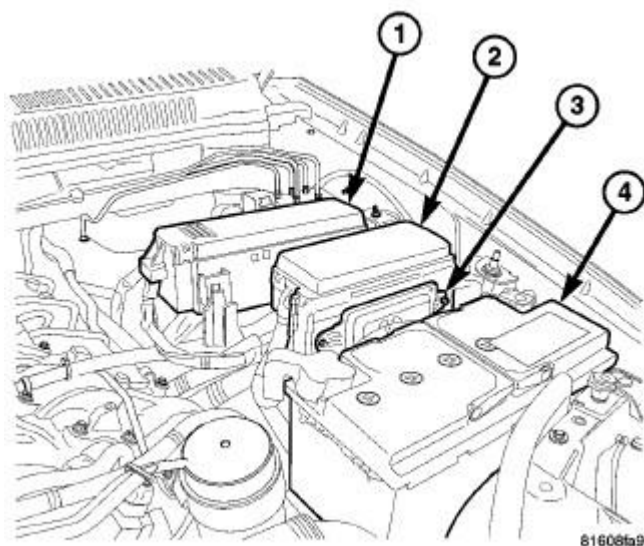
POWER DISTRIBUTION CENTER AND FRONT CONTROL MODULE
